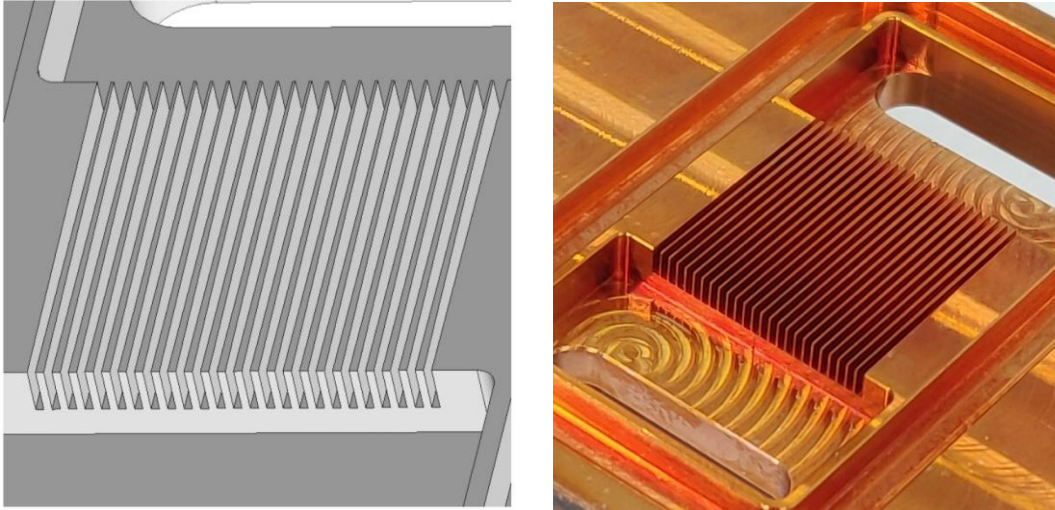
CAD model of the copper heat sink for geometry H (diverging) on the left, and on the right the manufactured test sample.
